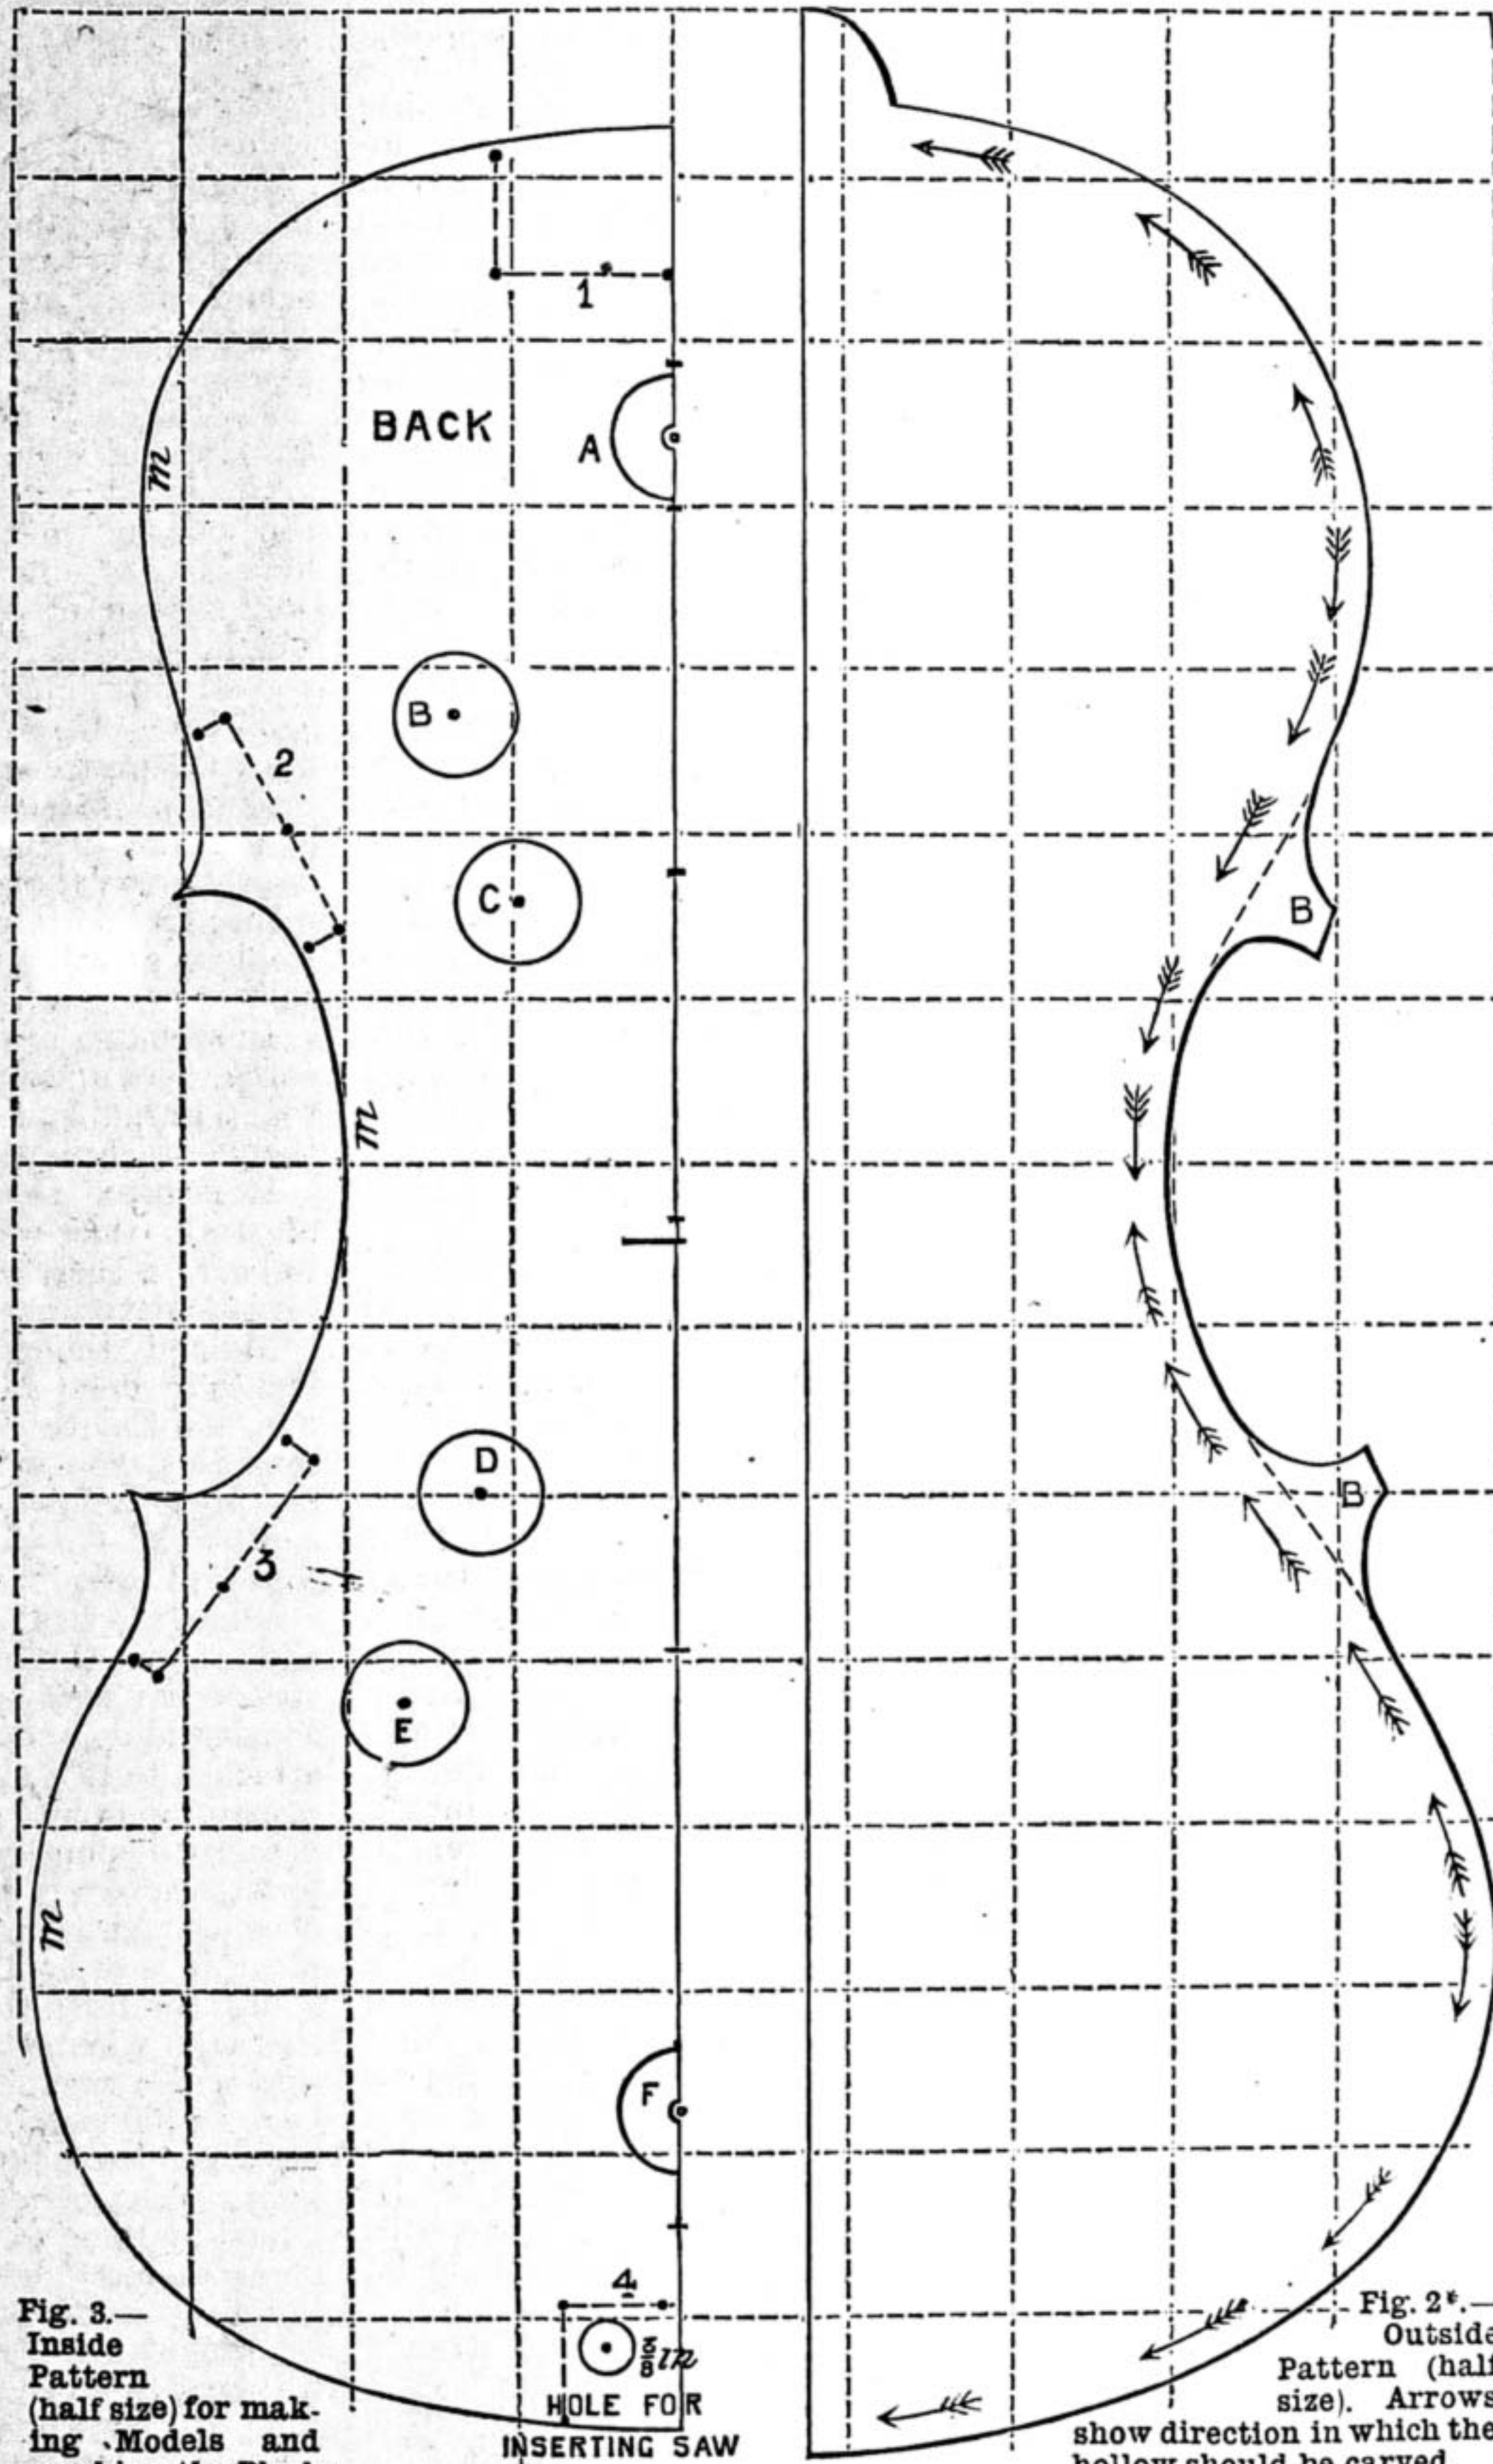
Inside Pattern (half size) for making Models and marking the Blocks.
